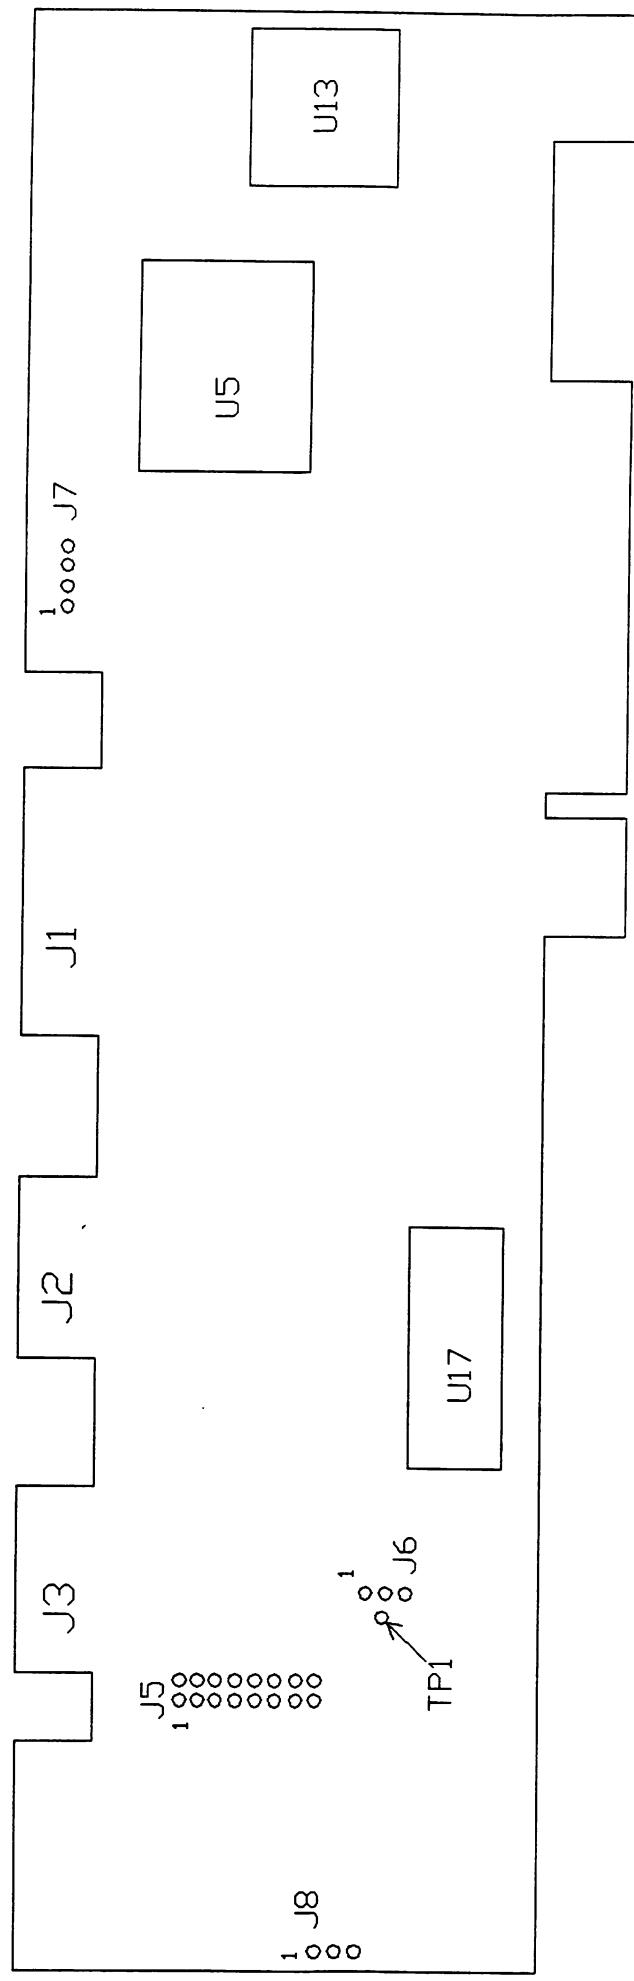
Adaptec ST506 Hard Drive Controller For Tandy 5000MC
